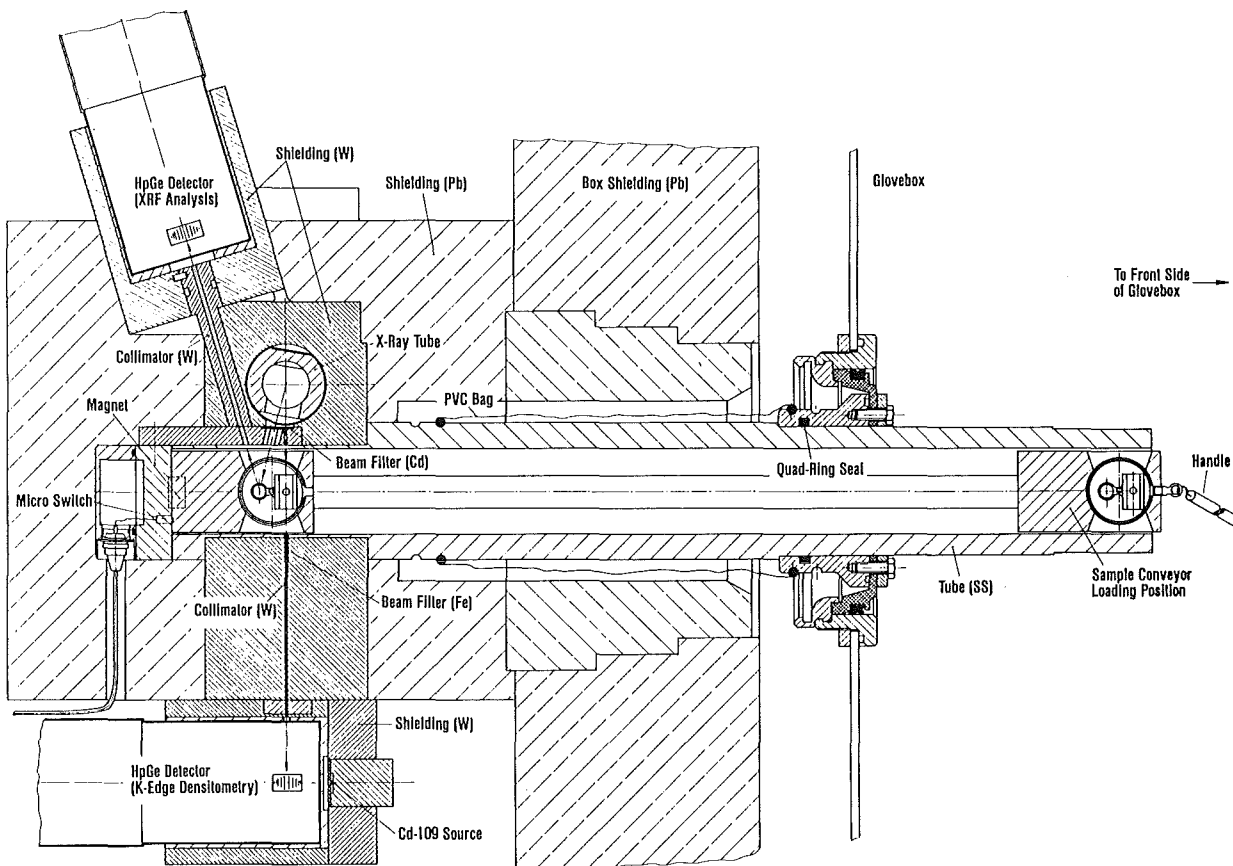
Plan of the Hybrid Instrument installation at the reprocessing plant of La Hague (Scale 1 : 4.5).
